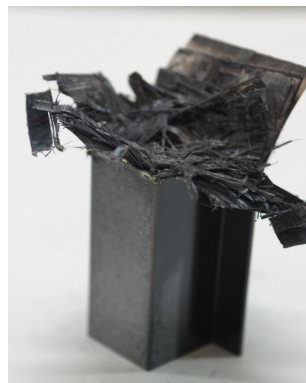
Collapsed shape of CFRP hat-shaped sectional member, 4 interface (wet specimen, outer angle  $90^\circ$ )
